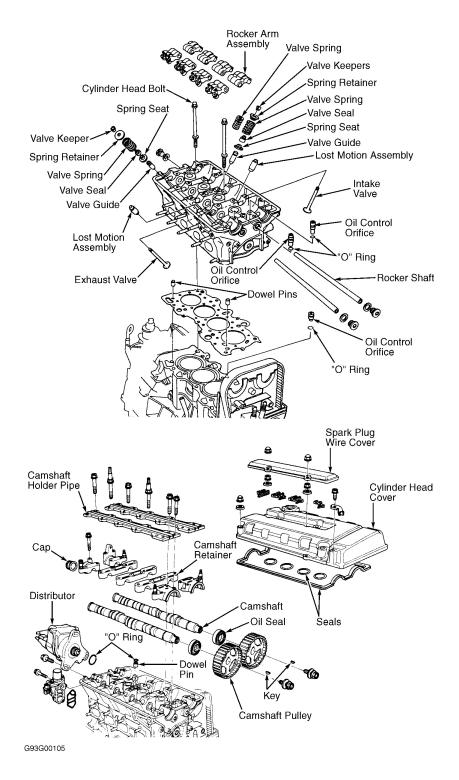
Exploded View Of Cylinder Head, Camshaft & Rocker Arm Assemblies Courtesy of AMERICAN HONDA MOTOR CO., INC.
